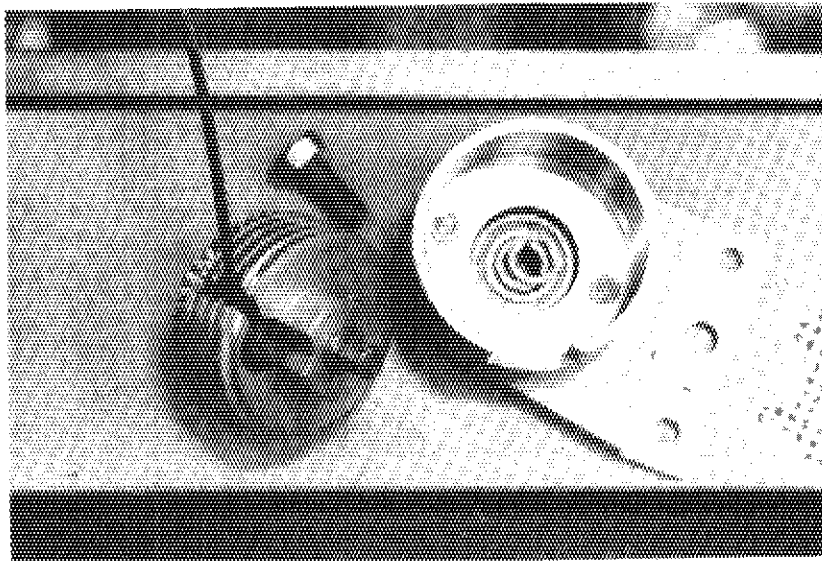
Winding reel for handle grip motion after disassembled from the master arm of the type A 100 manipulator
